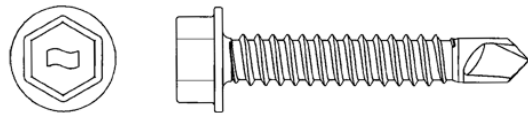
1/4-14 INDENTED HEX WASHER HEAD TYPE 6 SCREW
